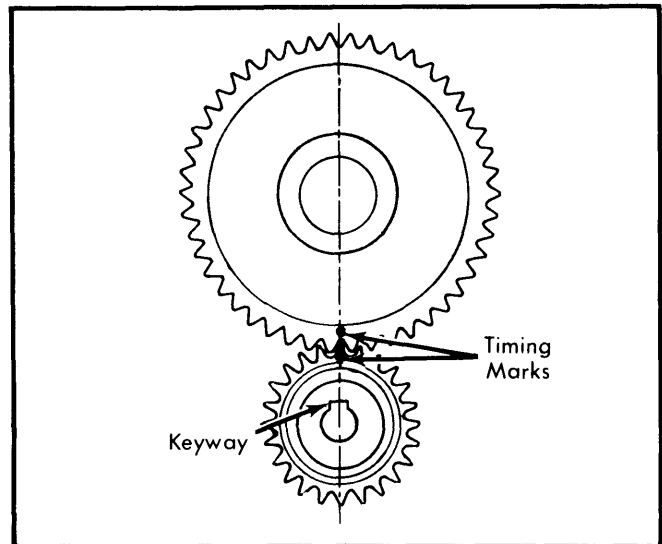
Timing Gear Marks Aligned with Crankshaft Keyway Facing Up
